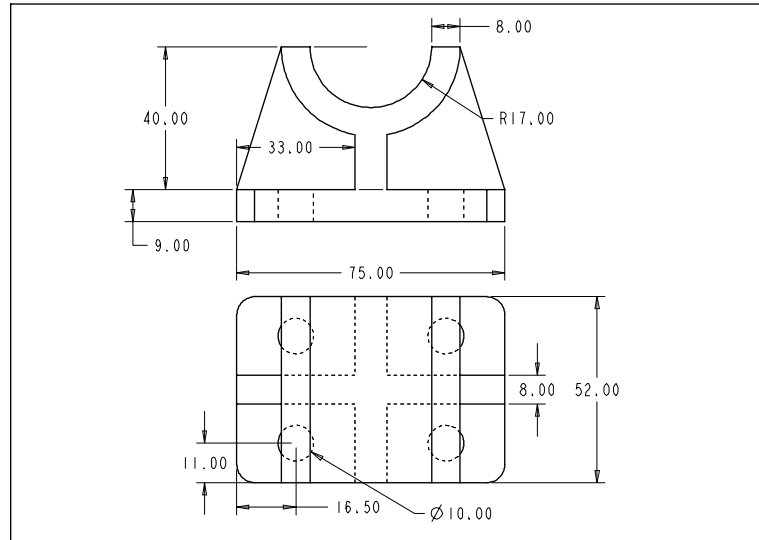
Figure showing the drawing views with dimensions before cleaning
